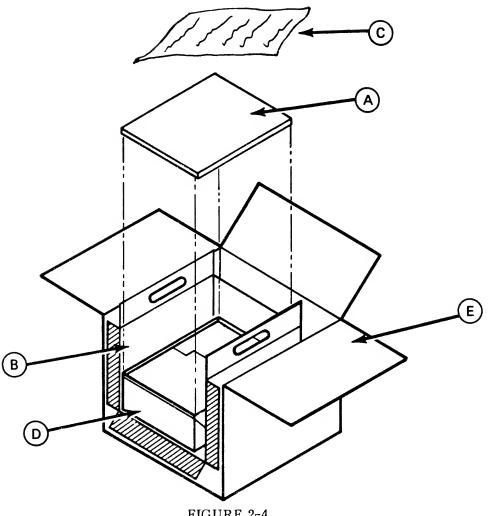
SERIES 2000 PACKING ASSEMBLY
